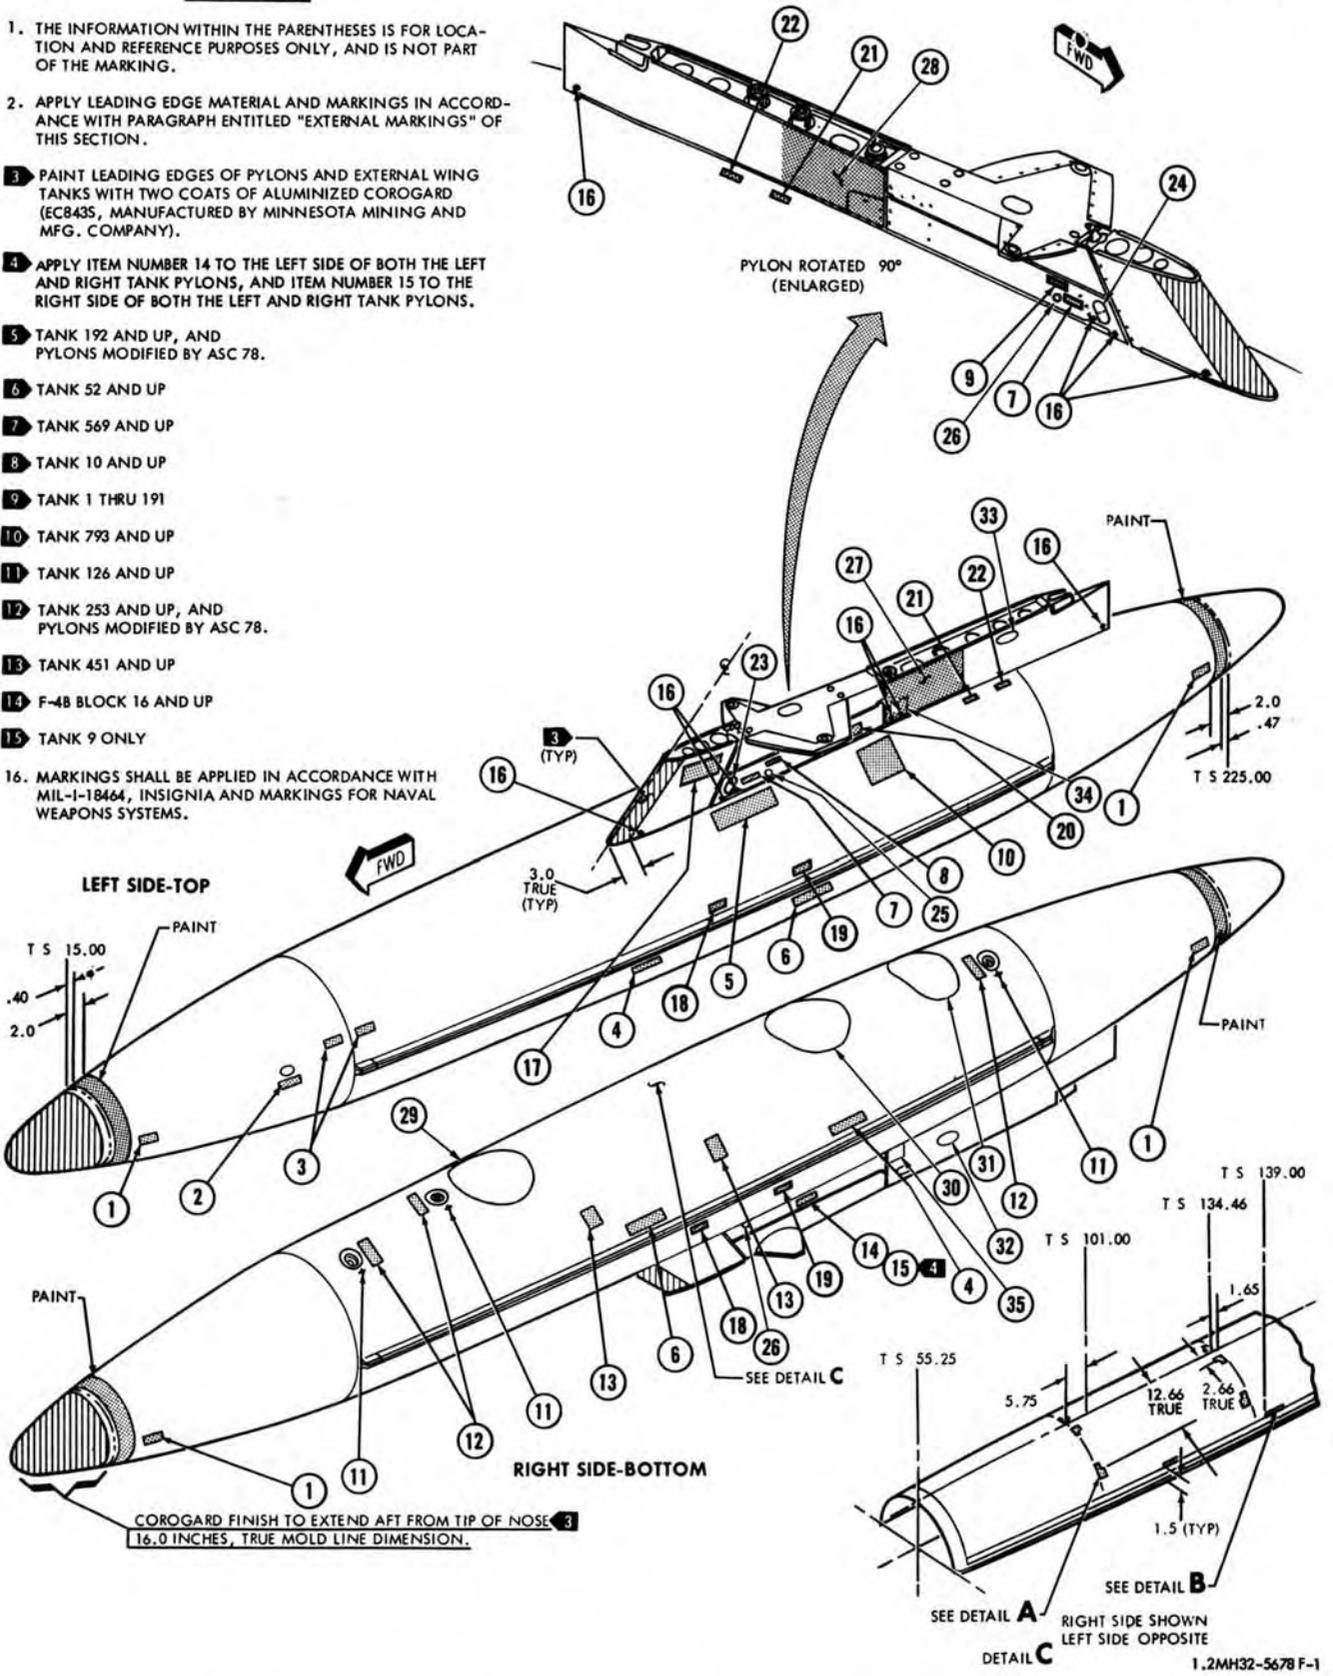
Wing External Fuel Tank and Pylon Markings (Sheet 1)
